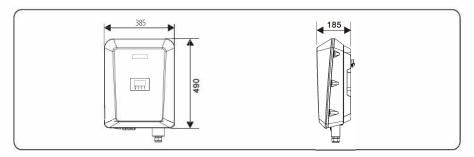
The dimensions of the inverter by front & lateral views (unit: mm)
